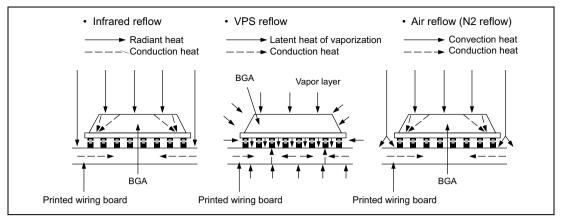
Heat Transfer Paths of Full Heating Methods
